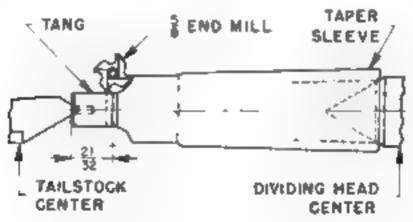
Milling a center key alot on a tapered sleeve adaptor
